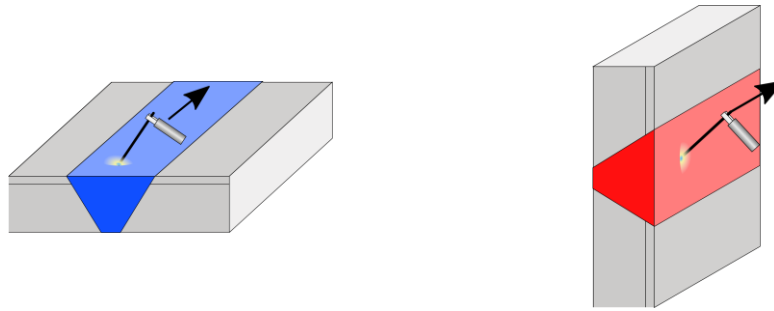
Flat welding position (left) and horizontal vertical welding position (right).
